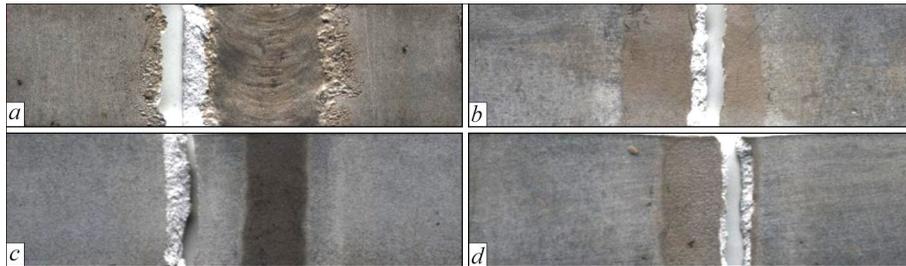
Appearance of the face (*a, c*) and root (*b, d*) surfaces of the working part of GTA welded specimens of 2 mm MA2-1M magnesium alloy with weld reinforcement (*a, b*) and without it (*c, d*)
